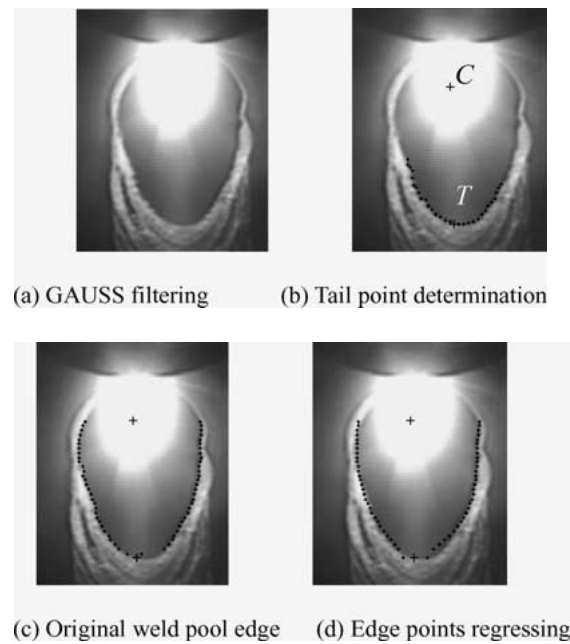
Weld pool image processing for robotic-pulsed GTAW.
